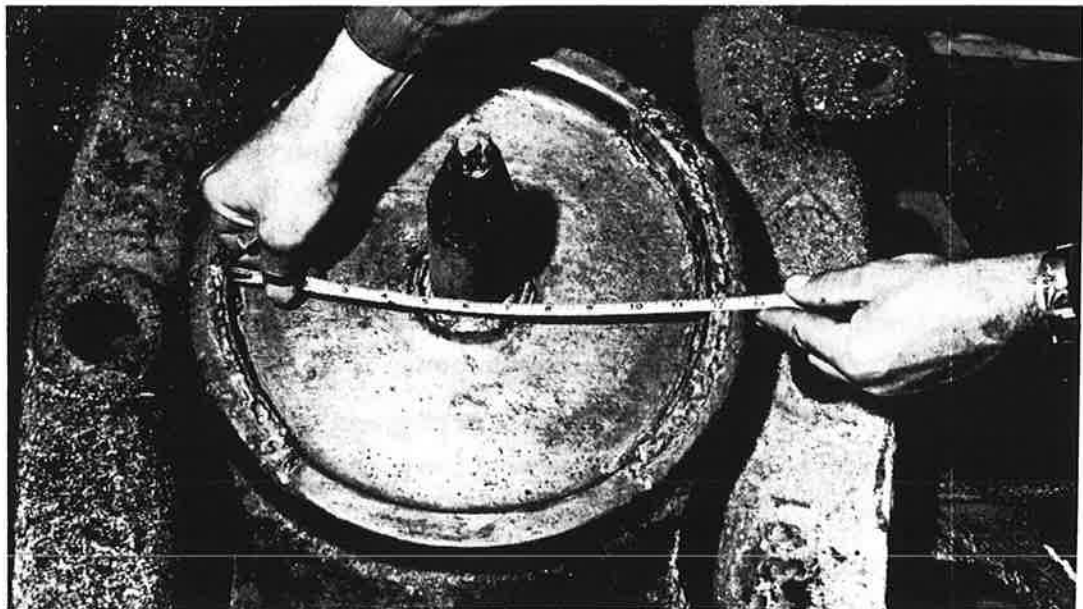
CABOOSE TRUCK BOLSTER AFTER SHIMMING.
